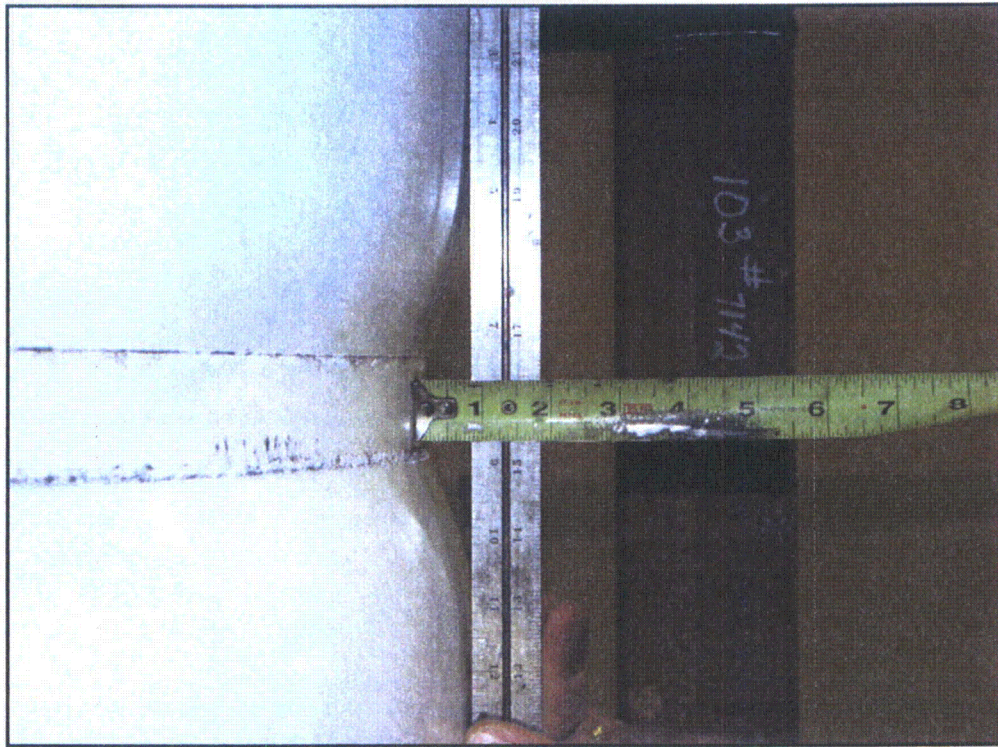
Permanent Deformation of NS30 #2 Canister Shell due to Interaction with Lower Test Fixture Centering Ring during Hot Side Drop
